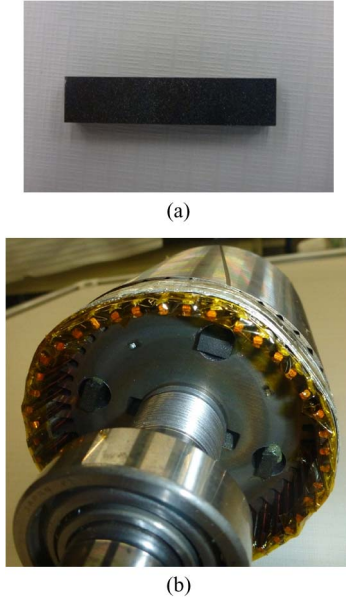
Photograph of fabricated HTS rotor. (a) Gd-system shield bulk. (b) Completed rotor.
